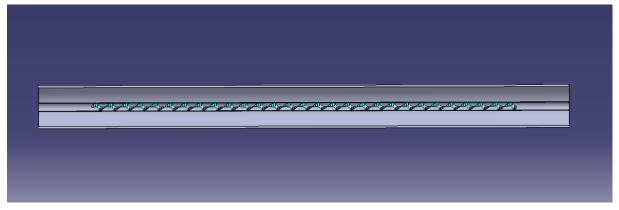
Section view of the assembled model of the double tube with twisted tape for TR 4
